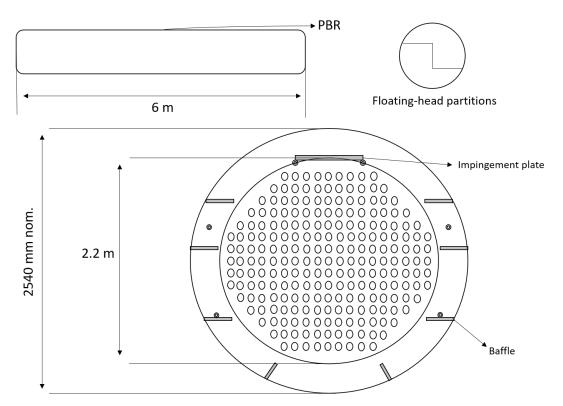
Tubesheet layout and reactor length for a single-pass floating-head partitioned shell and tube packed bed reactor, adapted from Fogler (2006)
